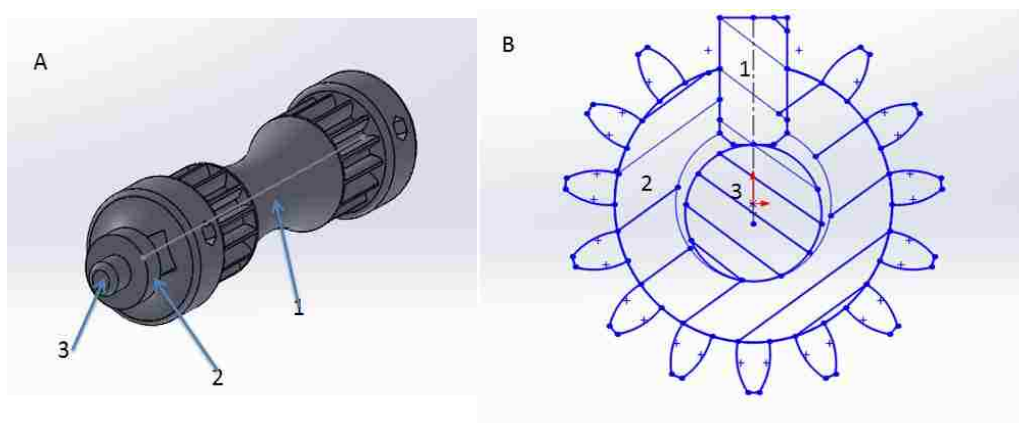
Schematic view after assembling the gear and pin together: A-1. Gear; A-2. Bearing; A-3. Pin; B-1. Grub screw; B-2. Gear; B-3. Pin
